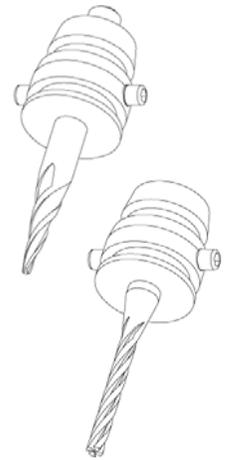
1/16" TAPERED CARVING BIT AND 1/8" STRAIGHT CUTTING BIT ASSEMBLIES
